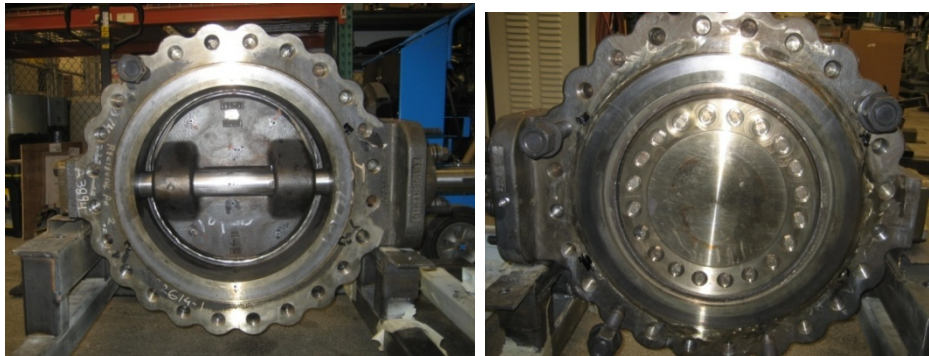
Valve Inlet (left), Valve Outlet (right)
